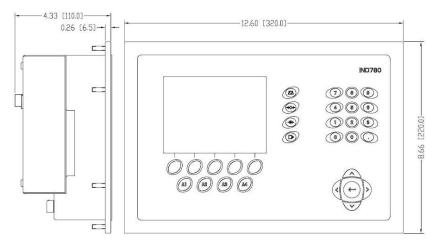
IND780 Panel Mount Terminal Dimensions
